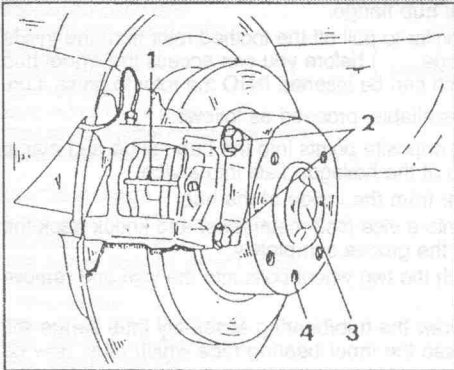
Details for the removal and installation of a rear wheel hub.
